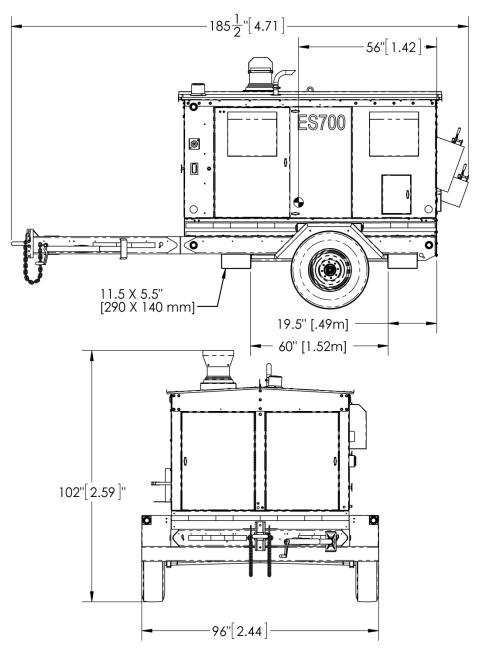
Machine dimensions mounted on Trailer PN 101159. Dimensions are in inches [meters] unless noted.
